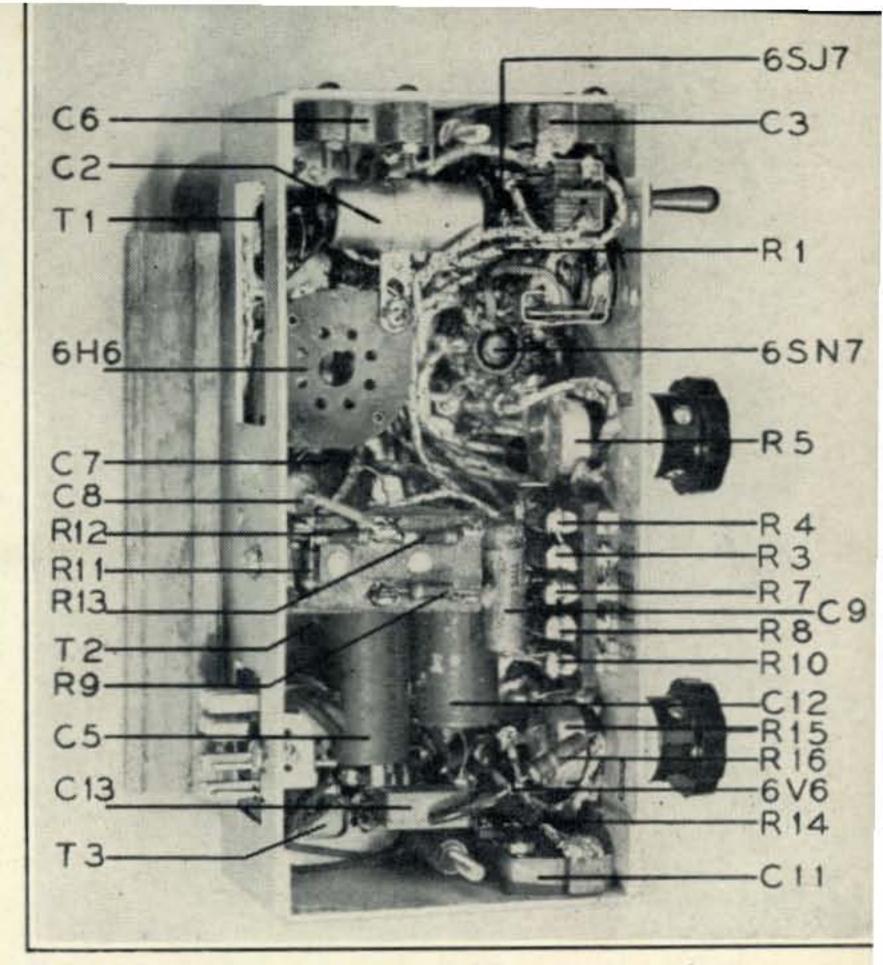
Bottom view of the amplifier showing placement of components. Location of the cathode resistors and by-passes, not visible, is described in text. The 6H6 is removed from it's socket to show positioning of the keyway.
